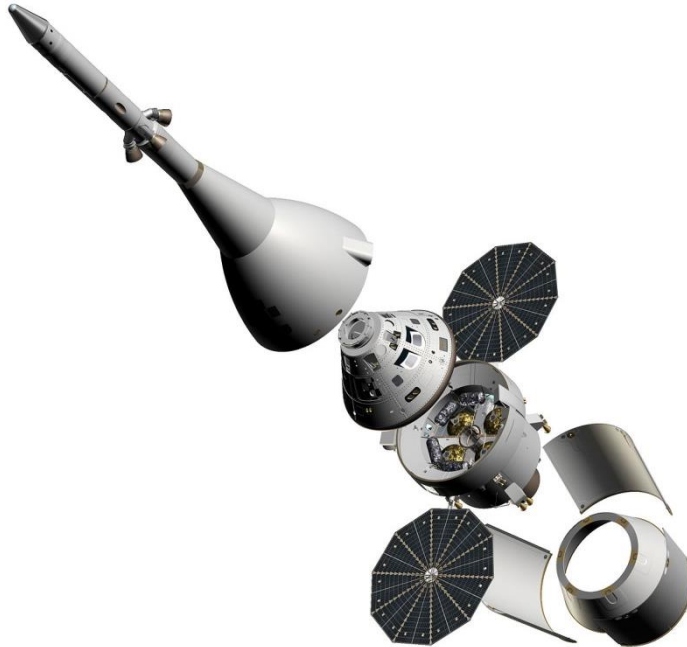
MPCV assembly. (Top to bottom) Launch Abort System (LAS), Crew Module (CM), Service Module (SM) and Spacecraft Adapter.
